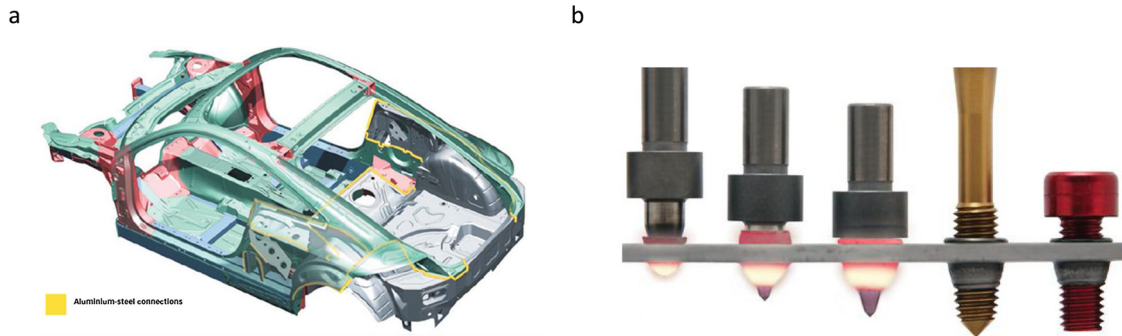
a. Connection between steel-aluminum (AudiTT[®]); b. Threaded holes in only one sheet of metal (Form drilling[®]).
